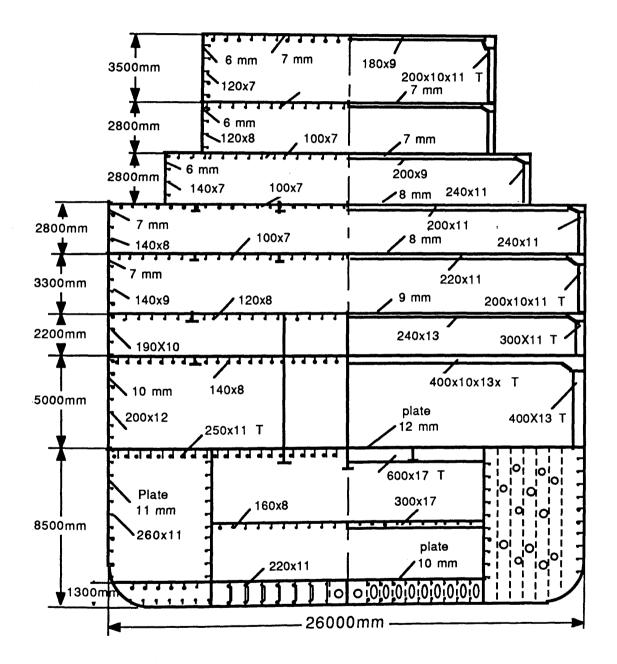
The structural arrangement of mid-ship section and chosen dimensions
